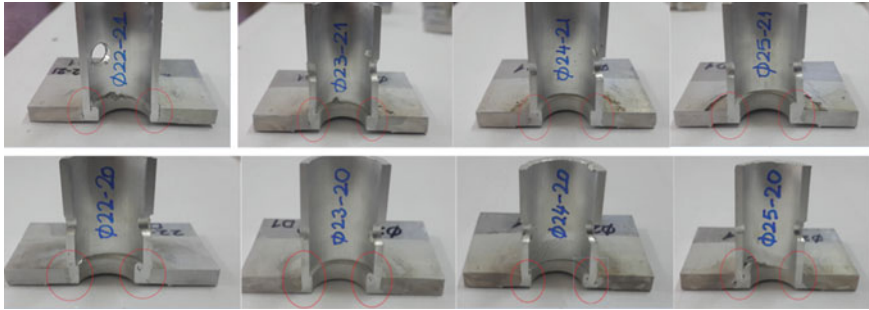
Macroscopic view of cross-section of FWTPET with weld mouth
